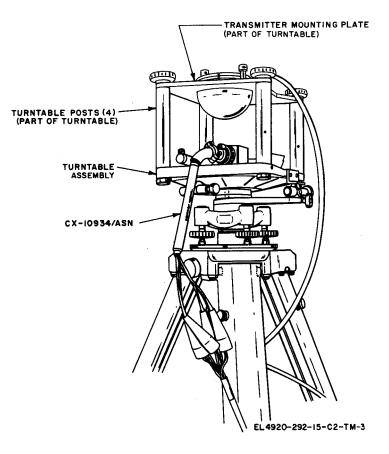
Remote Compass Transmitter ML-1 mounted on turntable assembly for U-S aircraft.
